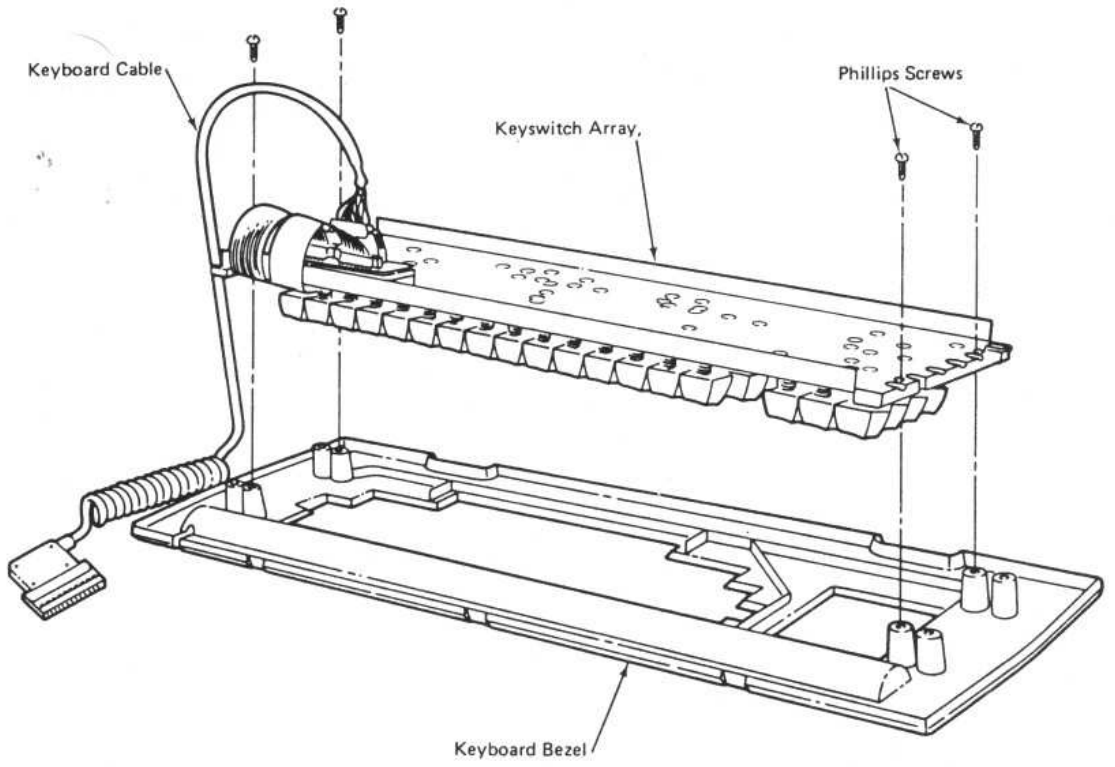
KEYBOARD ASSEMBLY—OCC1A
